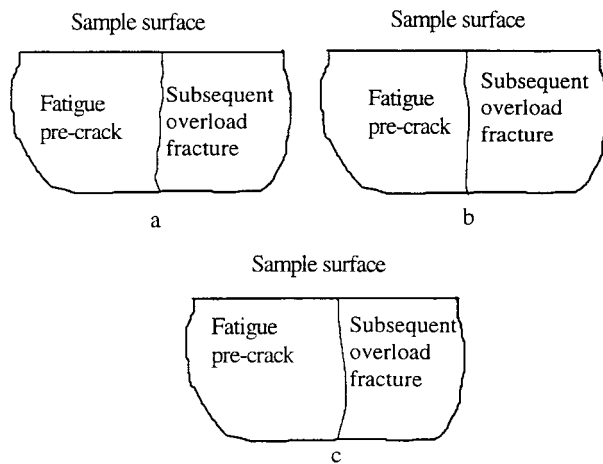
Shape of the fatigue pre-crack profile as visible on the fracture surface after breaking the specimen open after the experiments for series (a) AH (b) BH (c) CH.
